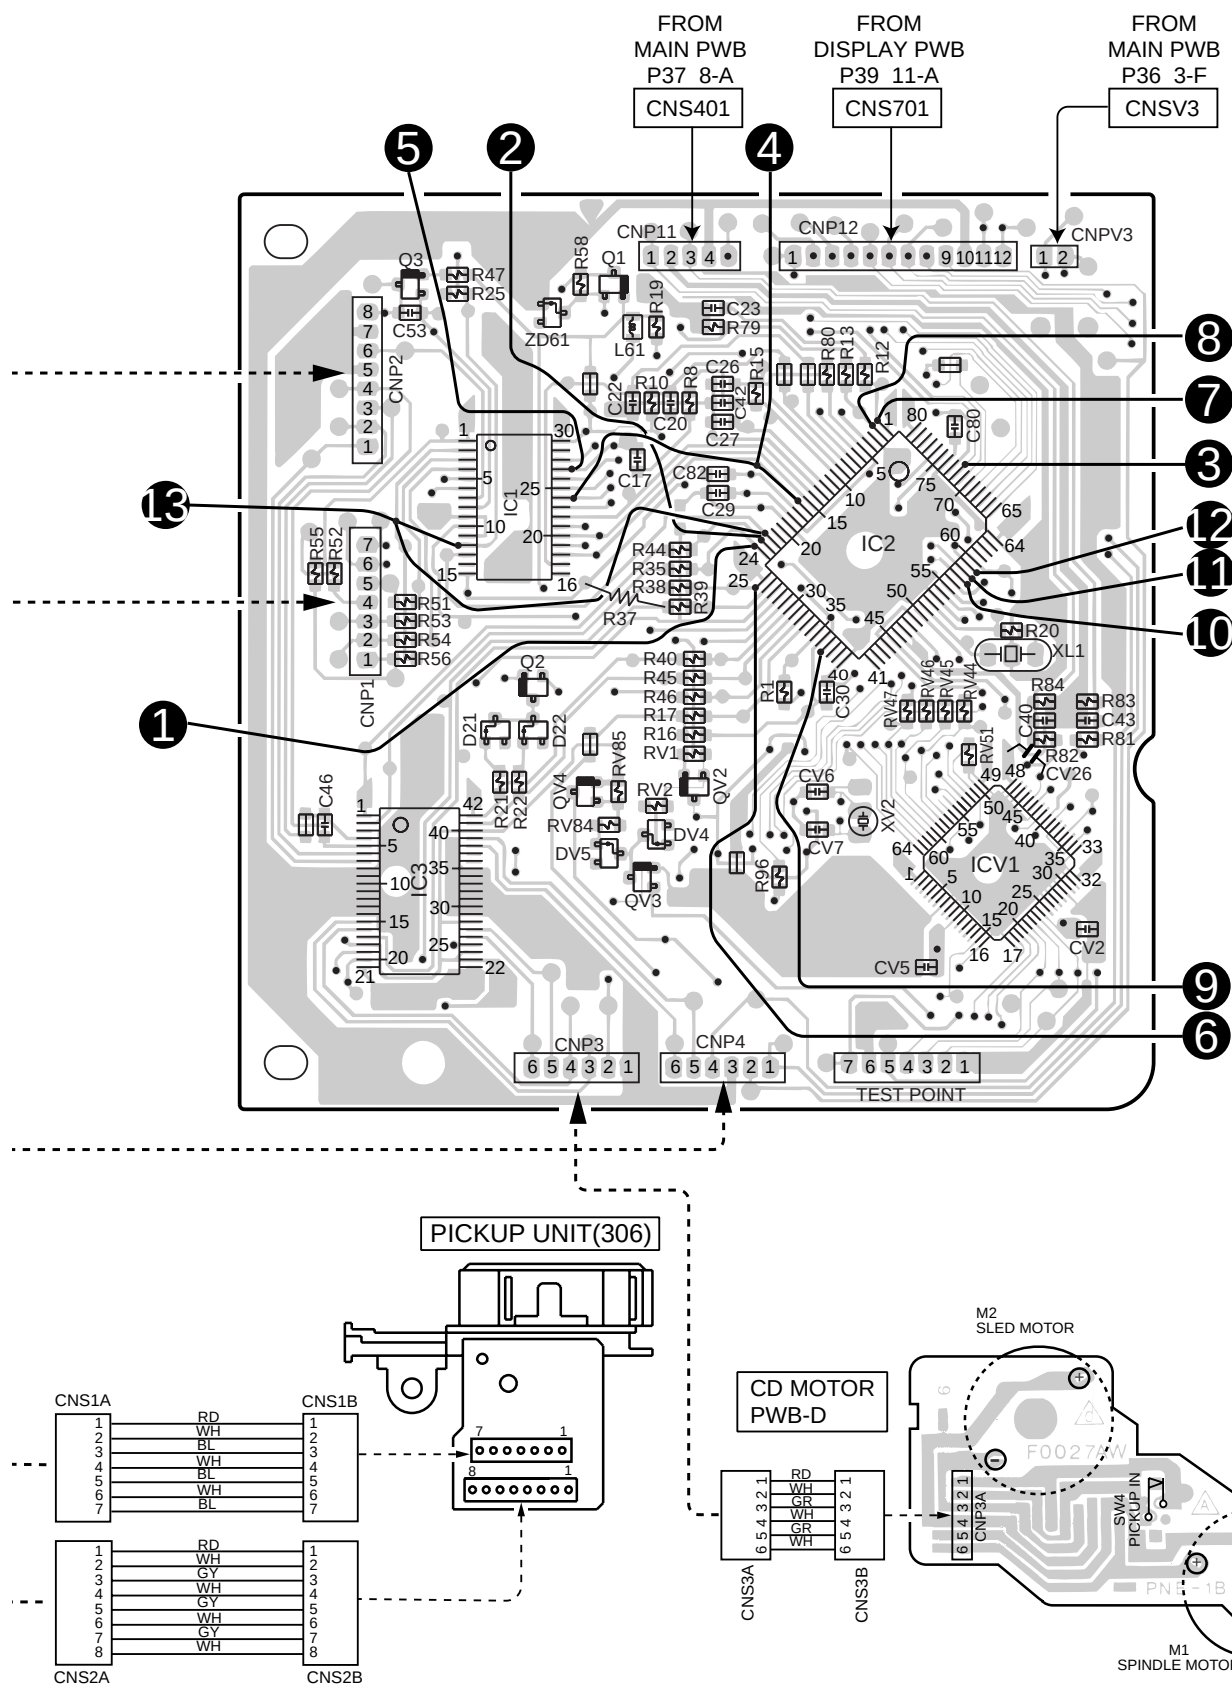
WIRING SIDE OF P.W.BOARD (9/9)
